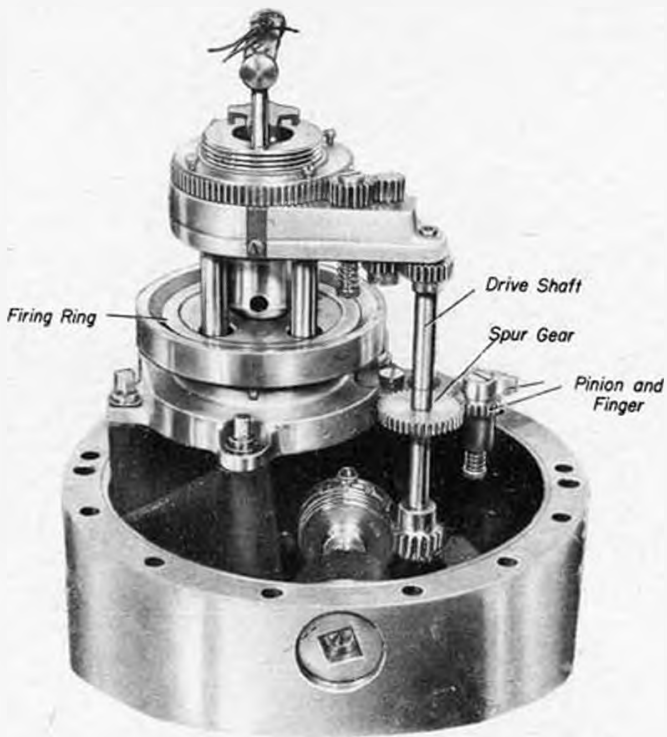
Mk 9 Exploder, Mechanical Unit
